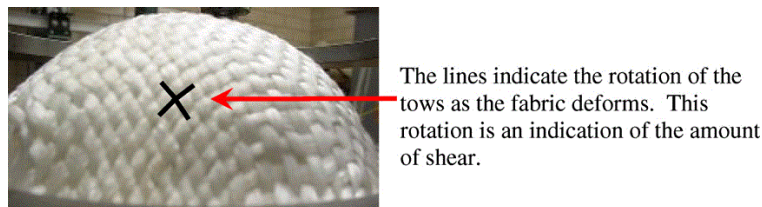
Fabric shearing while being draped onto a hemisphere [26]
